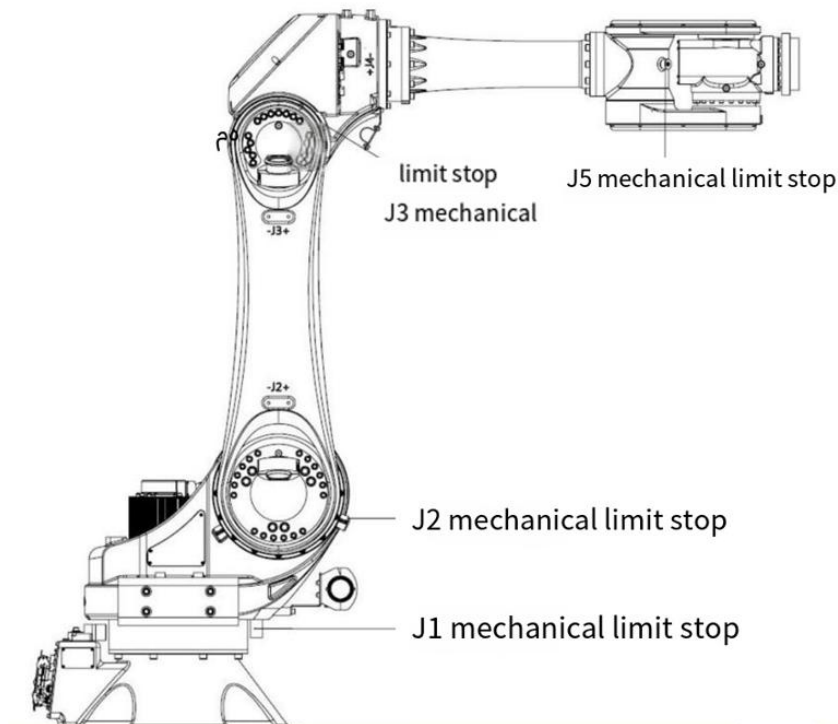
Mechanical Brake on RX3-A635-2700/RX3-A620-3100 Operator
